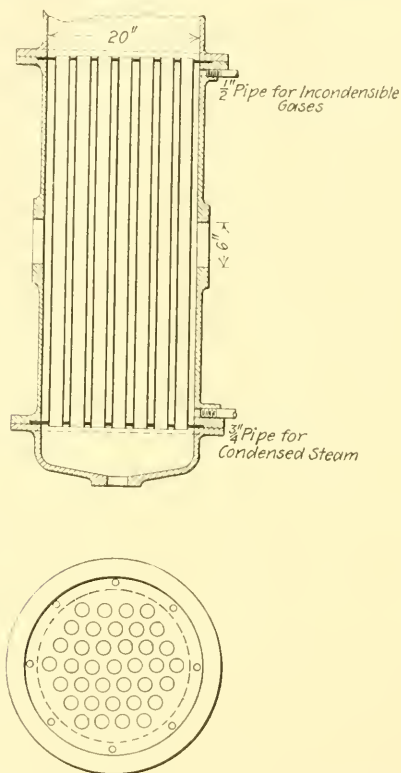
37 COPPER TUBES 2 IN. BY 48 IN. BY 18 BIRMINGHAM WIRE GAGE
